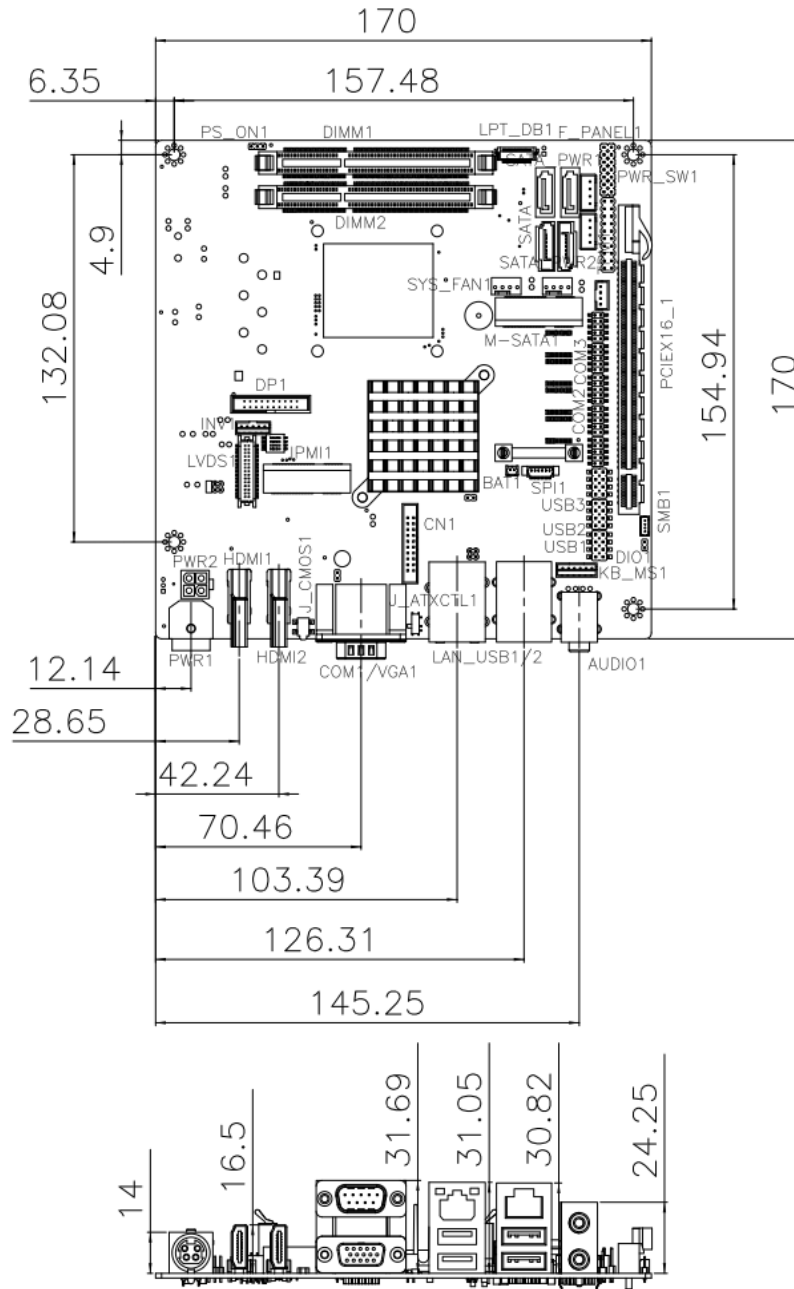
KINO-DQM871-i1 Dimensions (mm)
